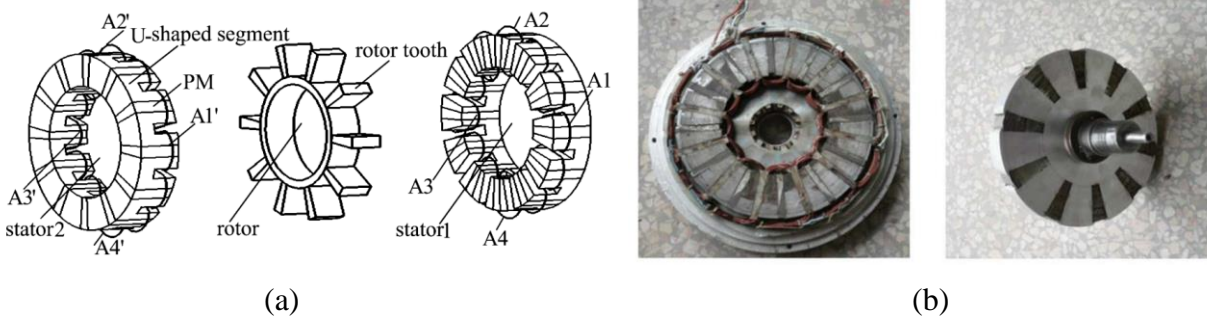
Axial field flux-switching permanent magnet machine with two stators and one rotor, (a) topology illustration, (b) prototype stator and rotor [225].
